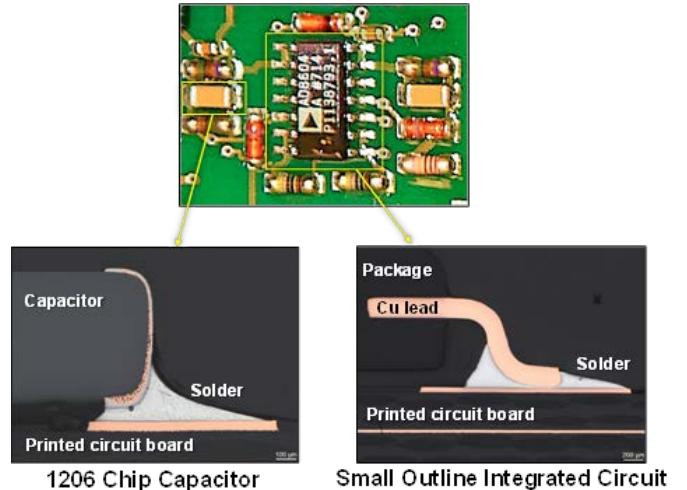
Stereo photograph and optical micrograph show the packages and solder joints of the 1206 chip capacitor and SOIC component that were modeled using the TurboSiP[®] software.
